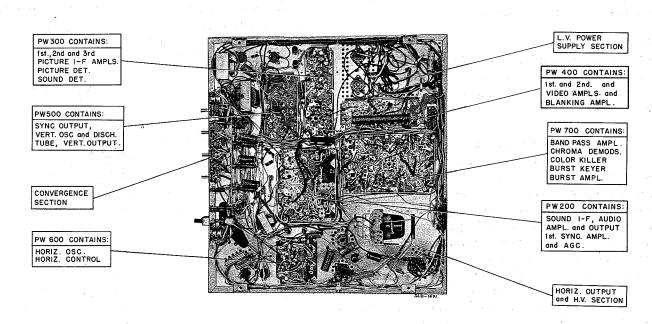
Bottom View—CTC5 Chassis, Showing Circuit and Printed Circuit Board Locations.
